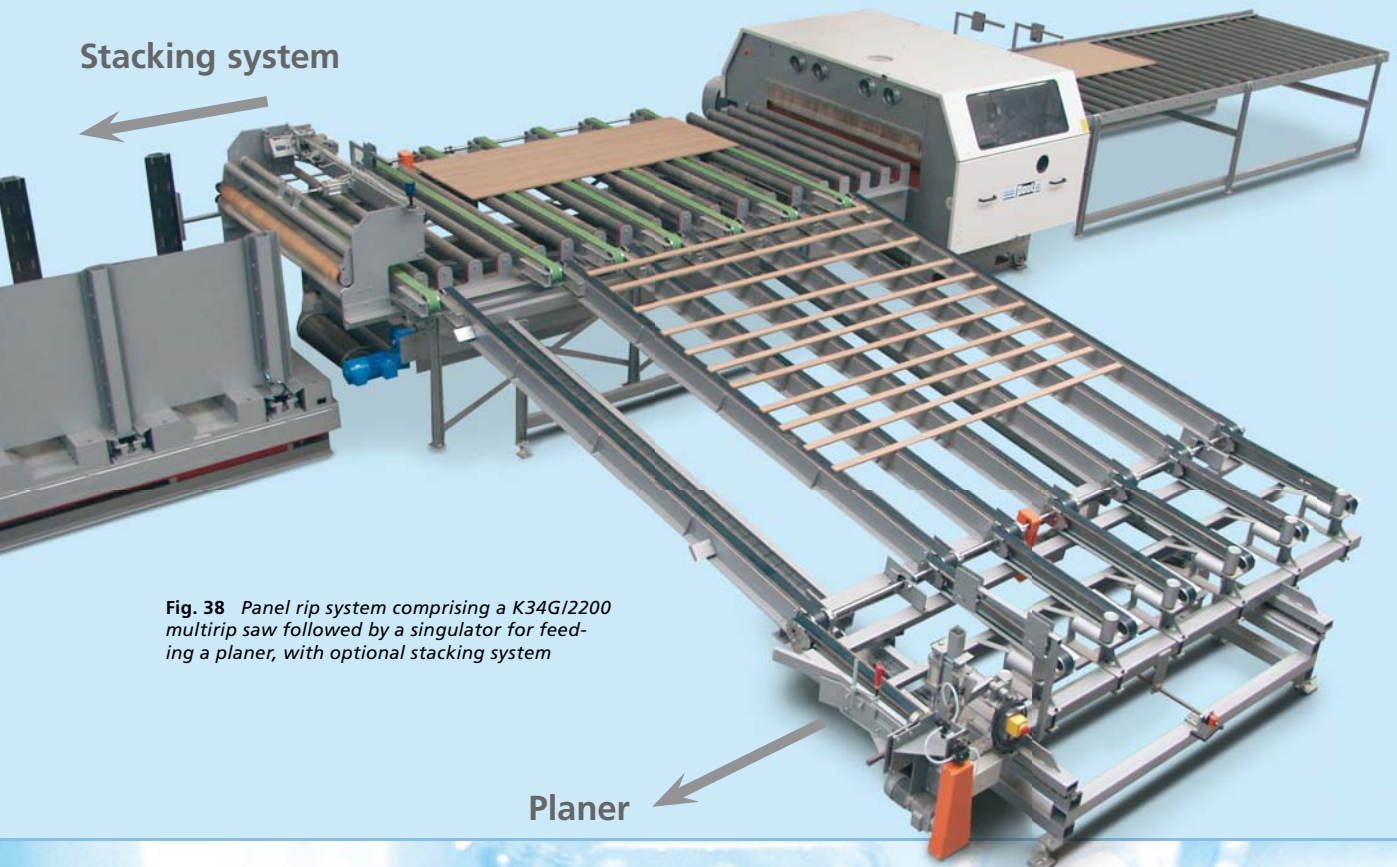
Panel rip system comprising a K34G/2200 multirip saw followed by a singulator for feeding a planer, with optional stacking system
